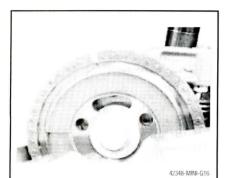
Aligning camshaft and timing chain reference marks-Cooper Coupe
